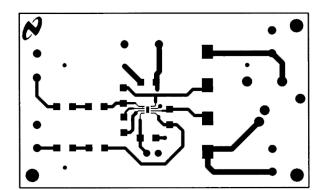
Recommended NGL0008B PC Board Layout Component-Side Layout
